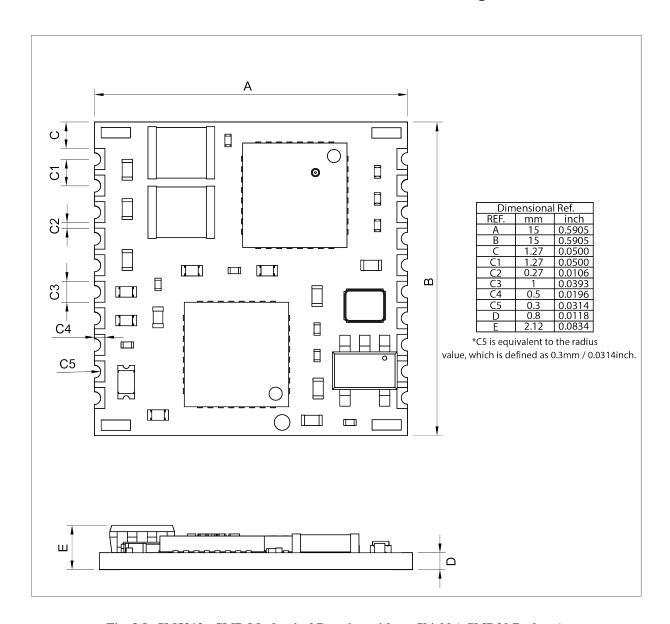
SM5212-uSMD Mechanical Drawing without Shield (uSMD20 Package)
